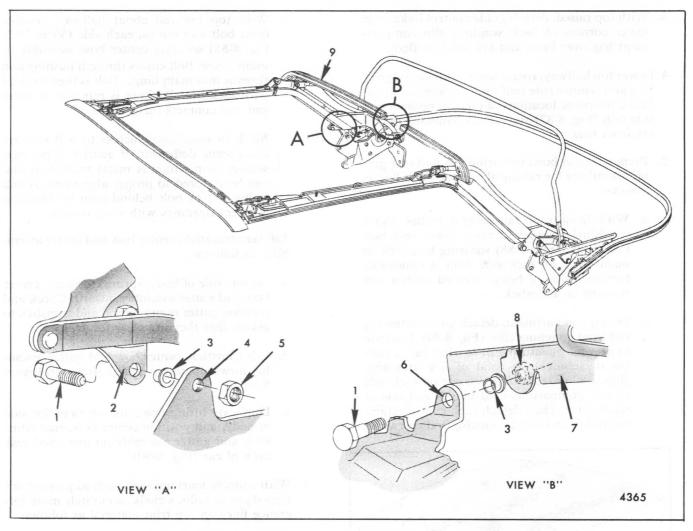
Center Bow Assembly and Rear Trimstrick Attachment
